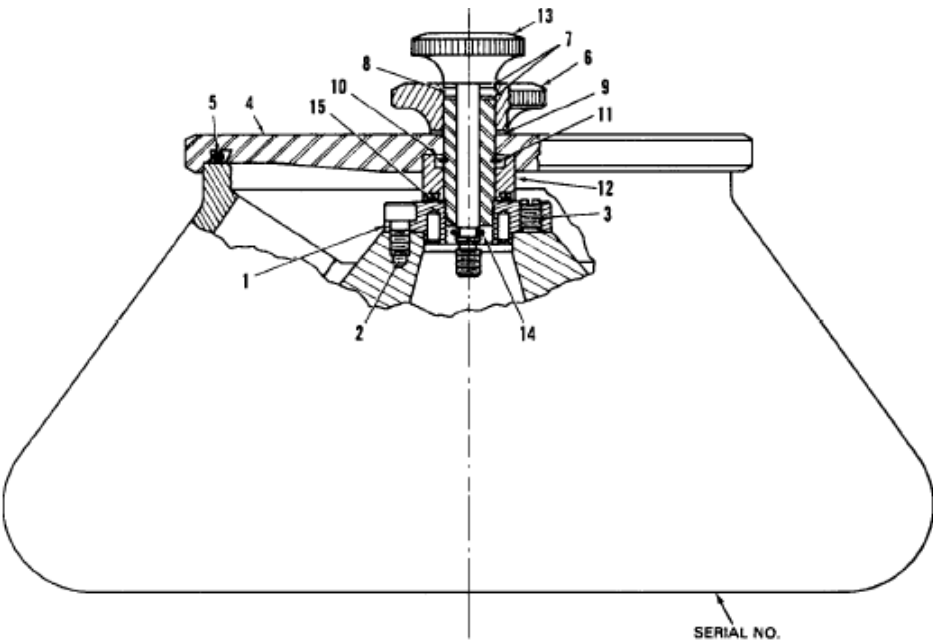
Parts Location: SA-600, SE-12, SM-24 and SS-34 Rotors
